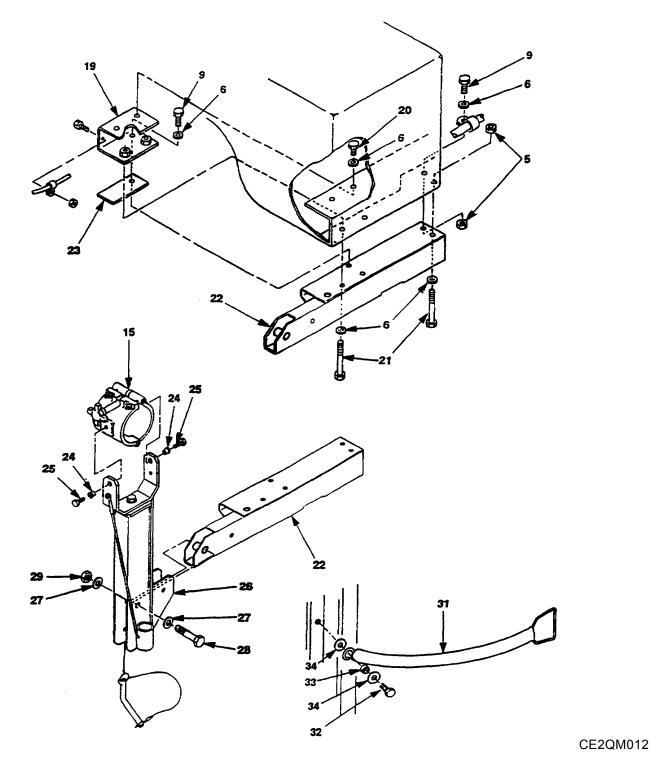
Universal HMMWV Vehicle Mount, MT-6967/G. (Sheet 2 of 2)
